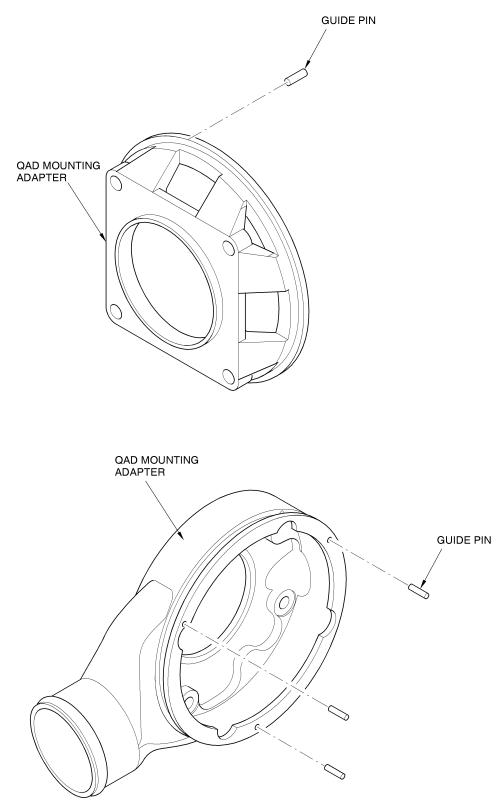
Repair of the Mounting Adapter Guide Pin
